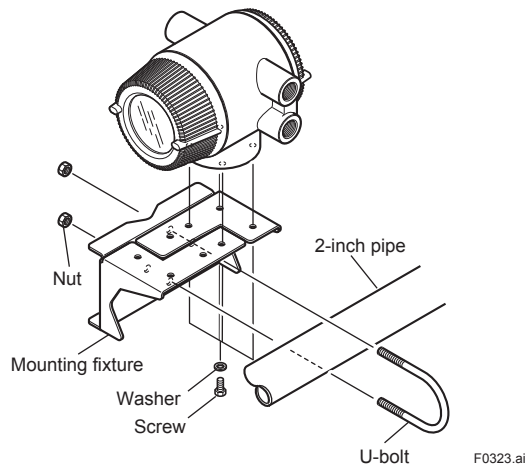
2-inch Pipe Horizontal Mounting
